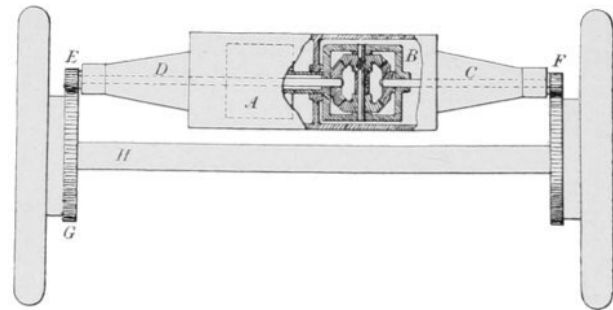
SINGLE MOTOR EQUIPMENTS.
